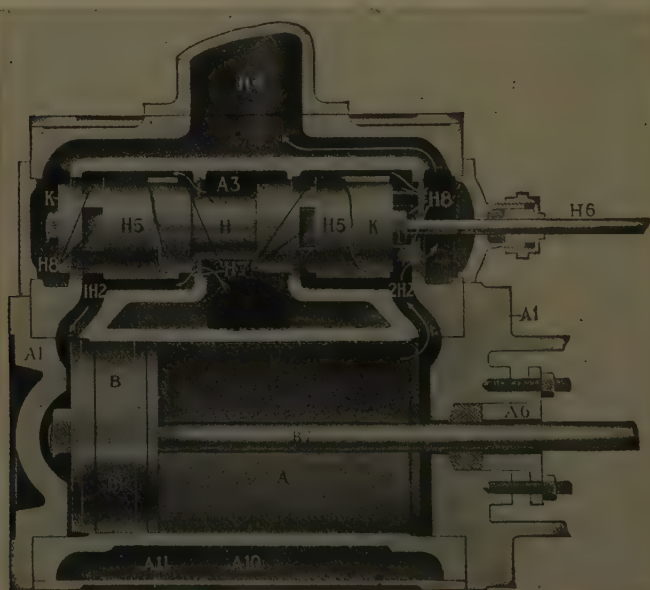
PHANTOM VIEW OF CYLINDER AND SLIDE VALVE
